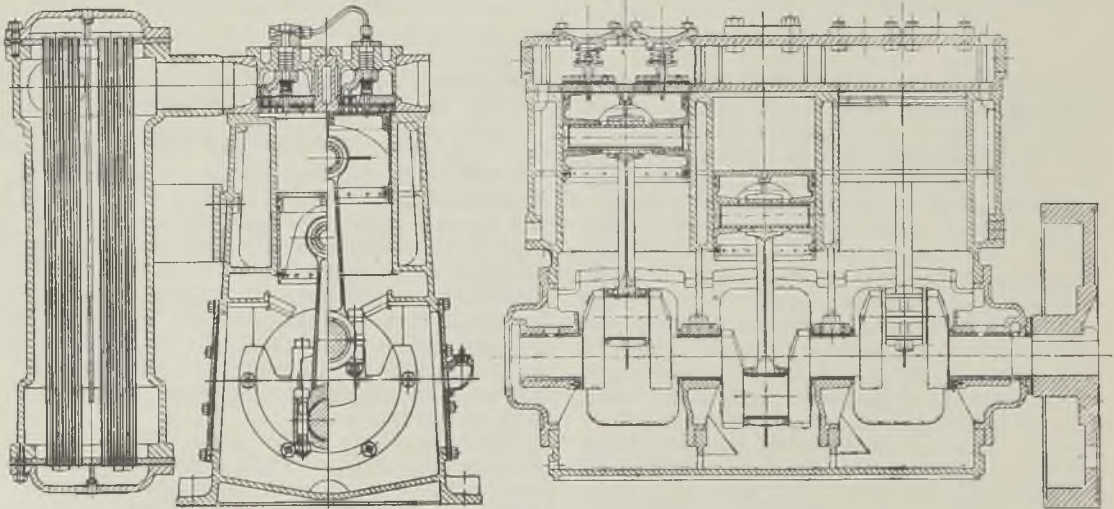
THREE-CYLINDER COMPRESSOR BODY WITH INTERCOOLER AS A SEPARATE CASTING.
